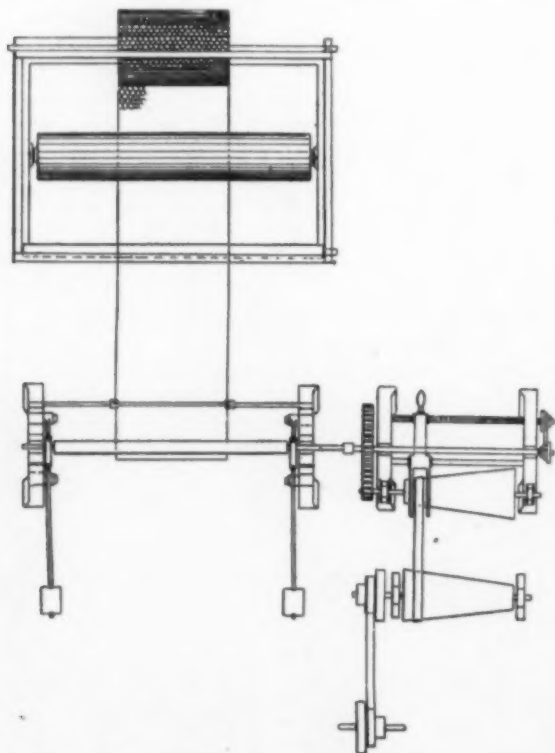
MACHINE FOR GALVANIZING WIRE NETTING.
